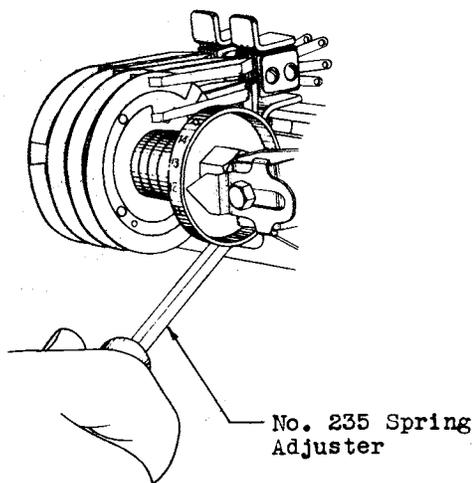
Method of Using the No. 235 Spring Adjuster in Adjusting Inner Contact Springs
